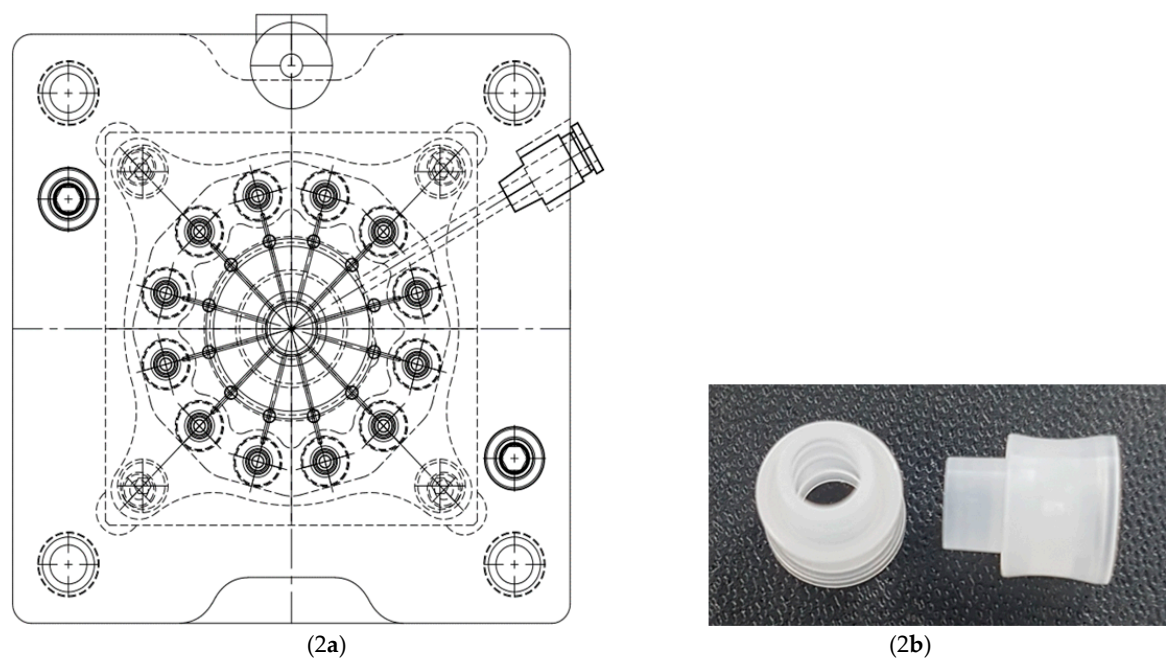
Schematic of the multi-cavity injection mold and the final molded part. (2a) Top-view schematic of the 12-cavity mold used with the high-precision injection molding machine, illustrating the radial arrangement of the cavities. (2b) Photograph of a single, as-molded polymer SealCap, which is the high-precision component investigated in this study.
